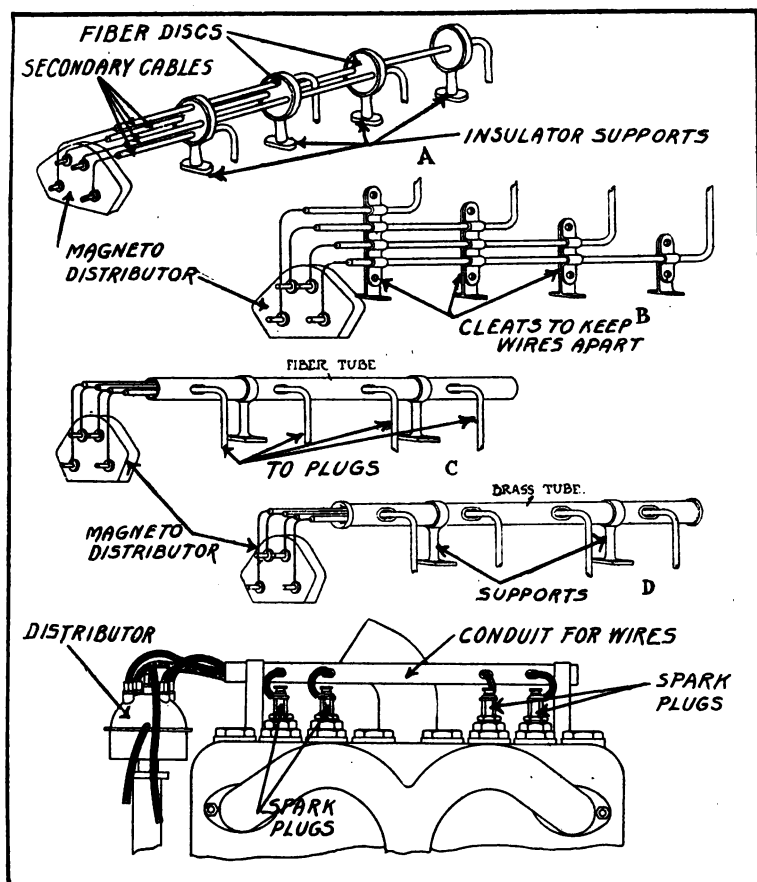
Methods of Insulating and Supporting Secondary Cable Assembly.
